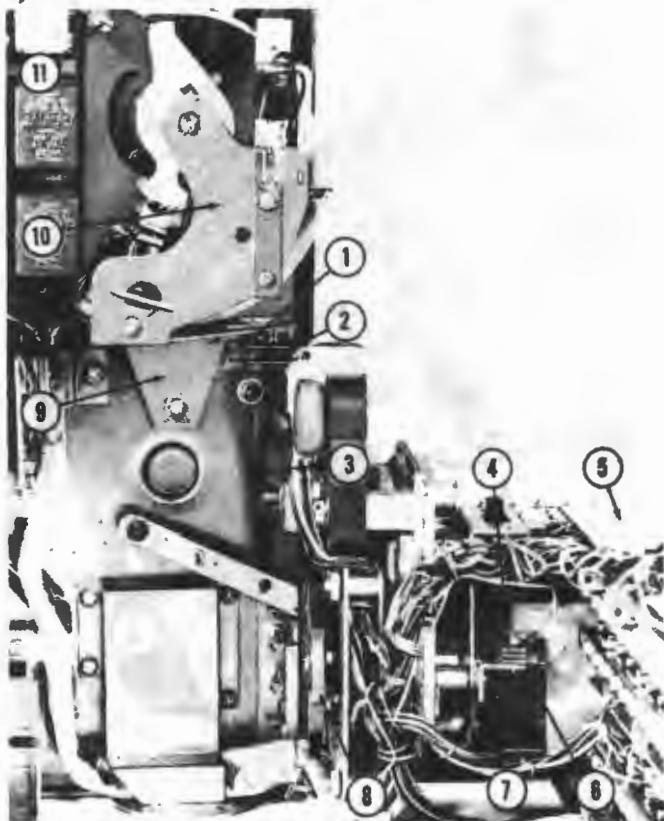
CANCEL & SWITCH ADJUSTMENT
